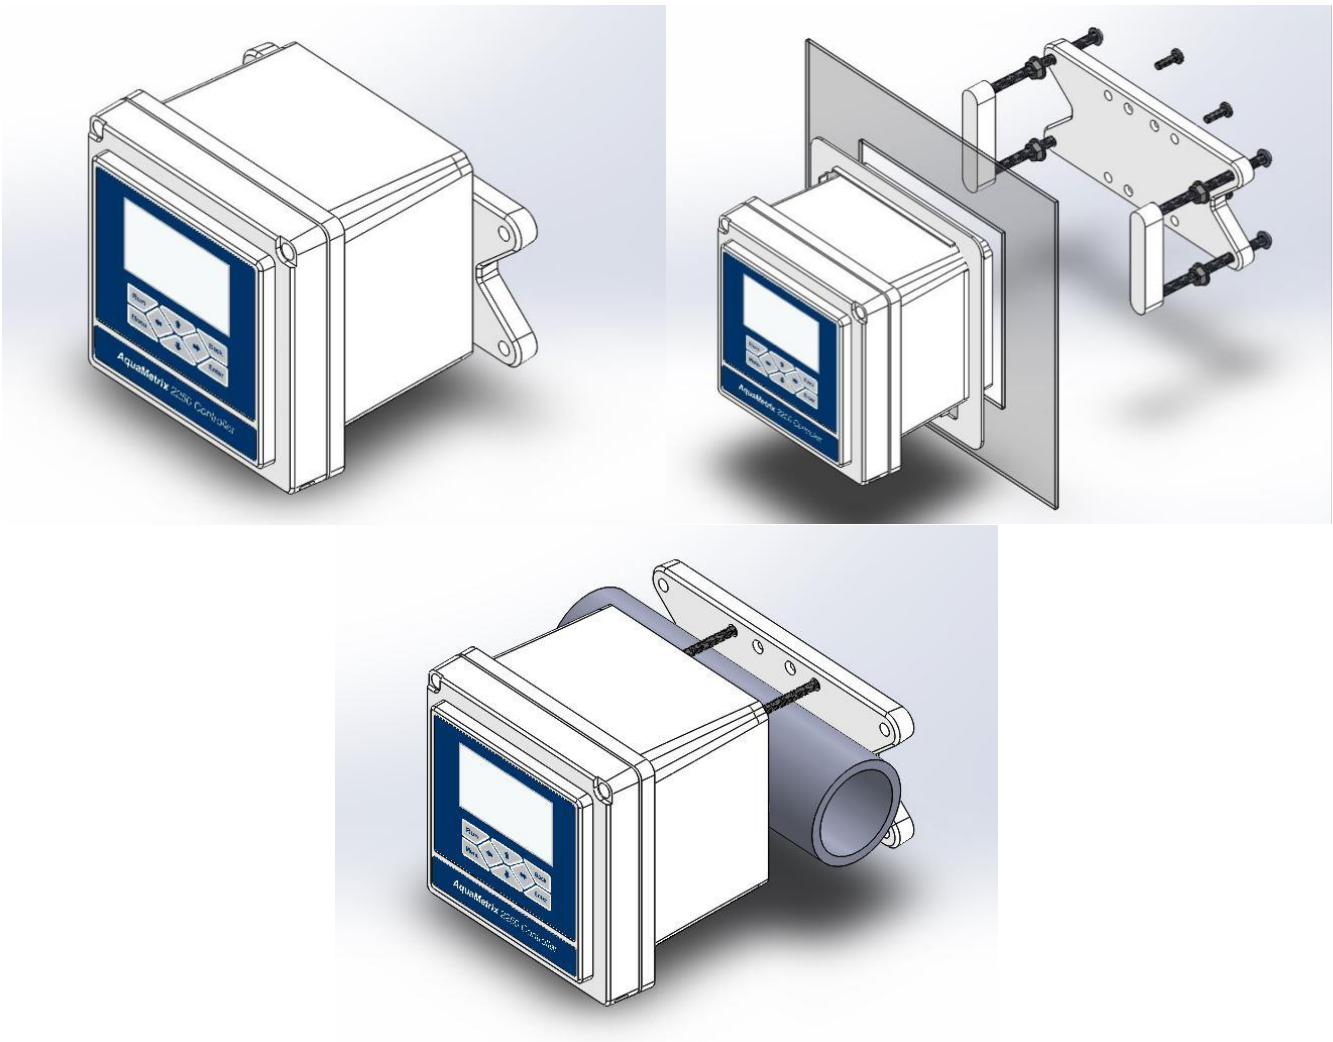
Three mounting options: wall, panel, and pipe.
